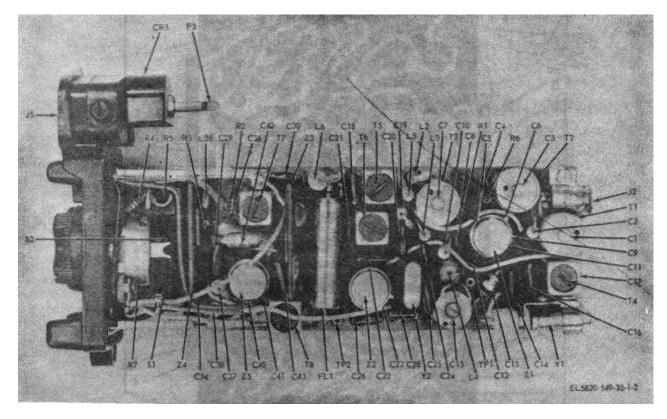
AN/PPR-R(XE-9) printed circuit board parts location.
